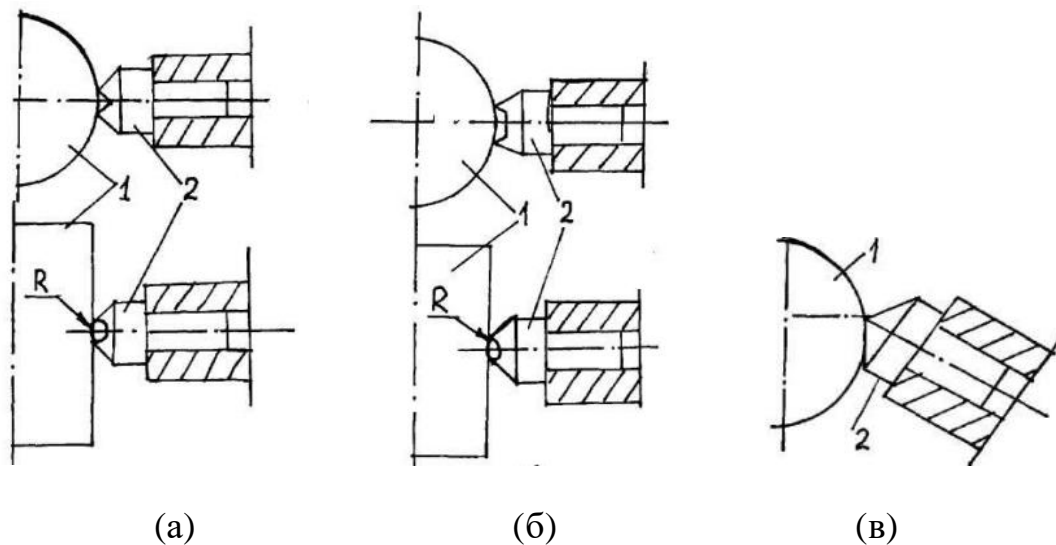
Schematic diagram of the burnishing devices during the processing of a cylindrical surface: a - spherical shape of sharpening, b - cylindrical, c - conical; 1 - machined surface, 2 - sharpening.
